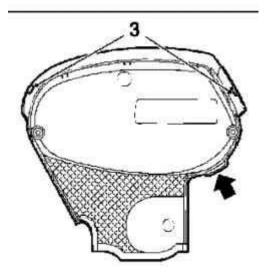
Mounting the front cover toothed belt: 1 - the front cover of the toothed belt 2 - mounting screws, 3 - Latch
